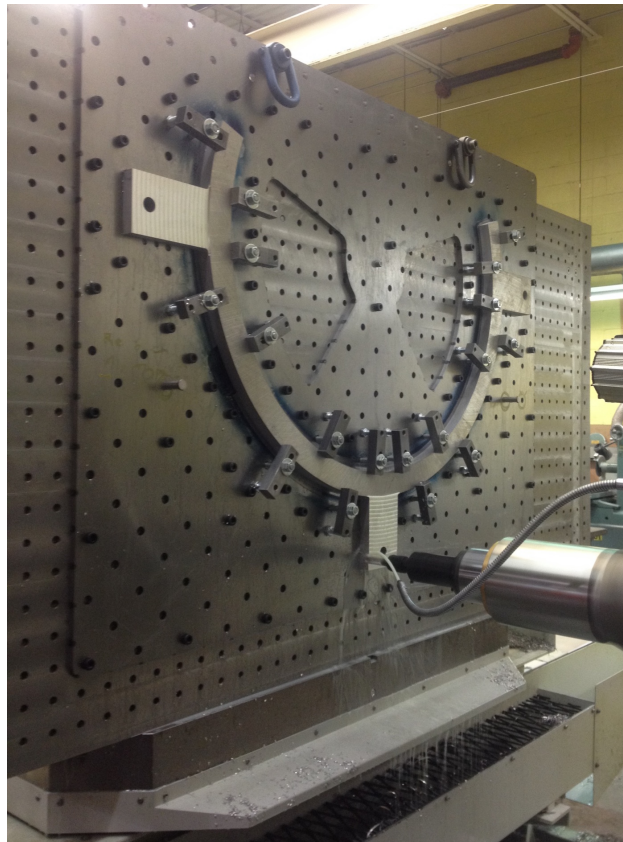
A photo of the bottom layer, showing the large computerized numerical control (CNC) mill machining the mounting points for the leveling actuators.
